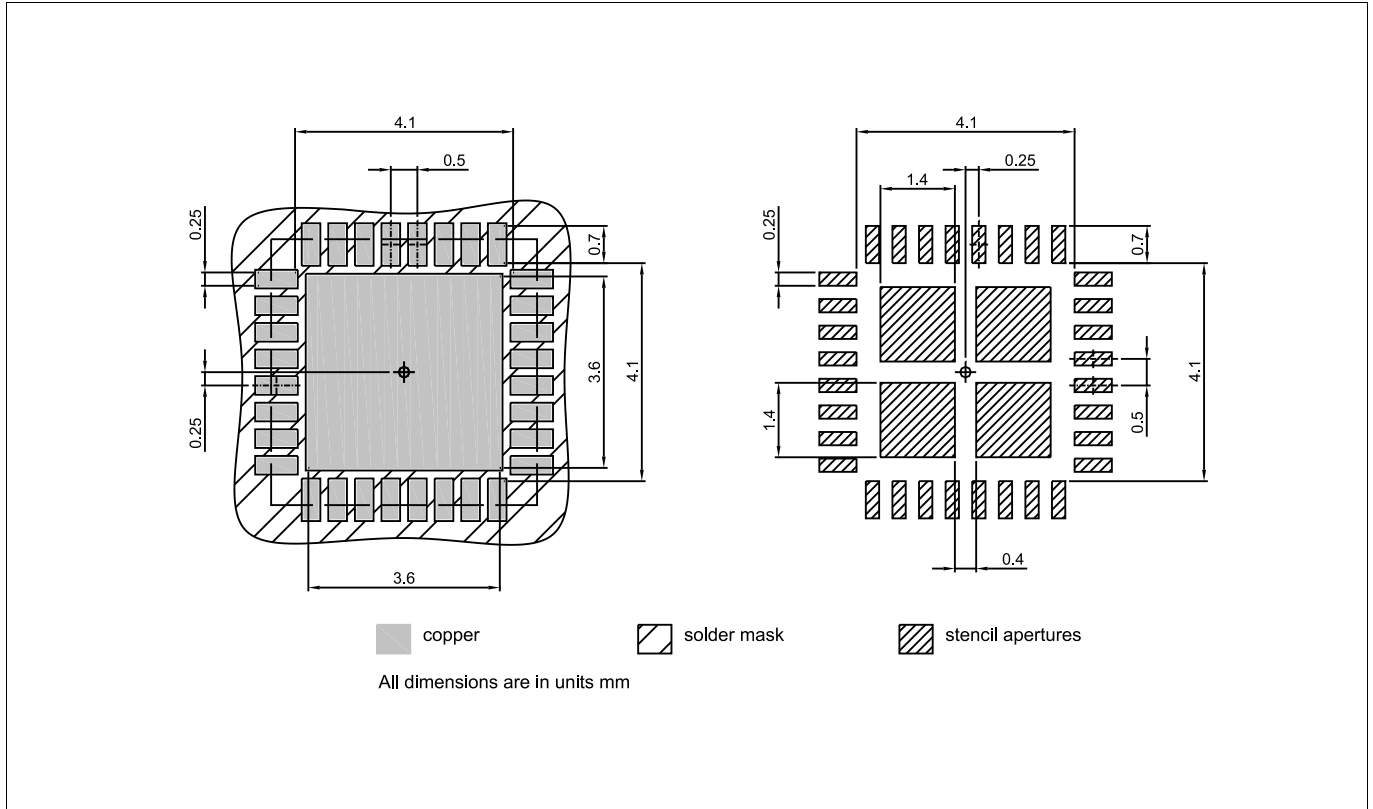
Recommended footprint PG-UQFN-32-1,-2
